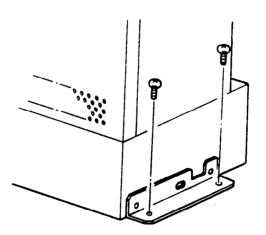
Attaching the Floor Mount Bracket to the Floor
